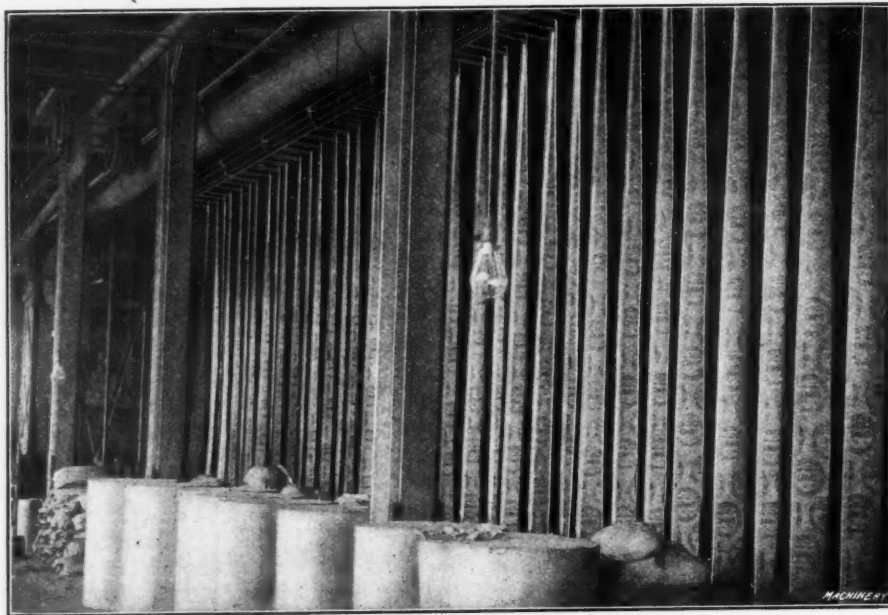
Partial View of Machine for coating Abrasive Paper and Cloth
